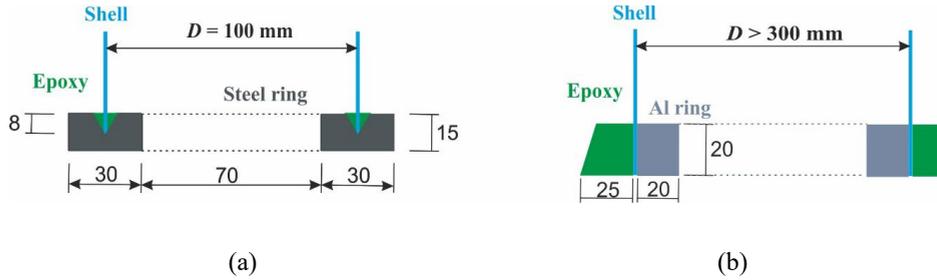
Schematic of the mounting of cylinders: (a) in the groove of a steel ring; (b) potting onto plates of the test machine. Dimensions in the figure are given in mm.
